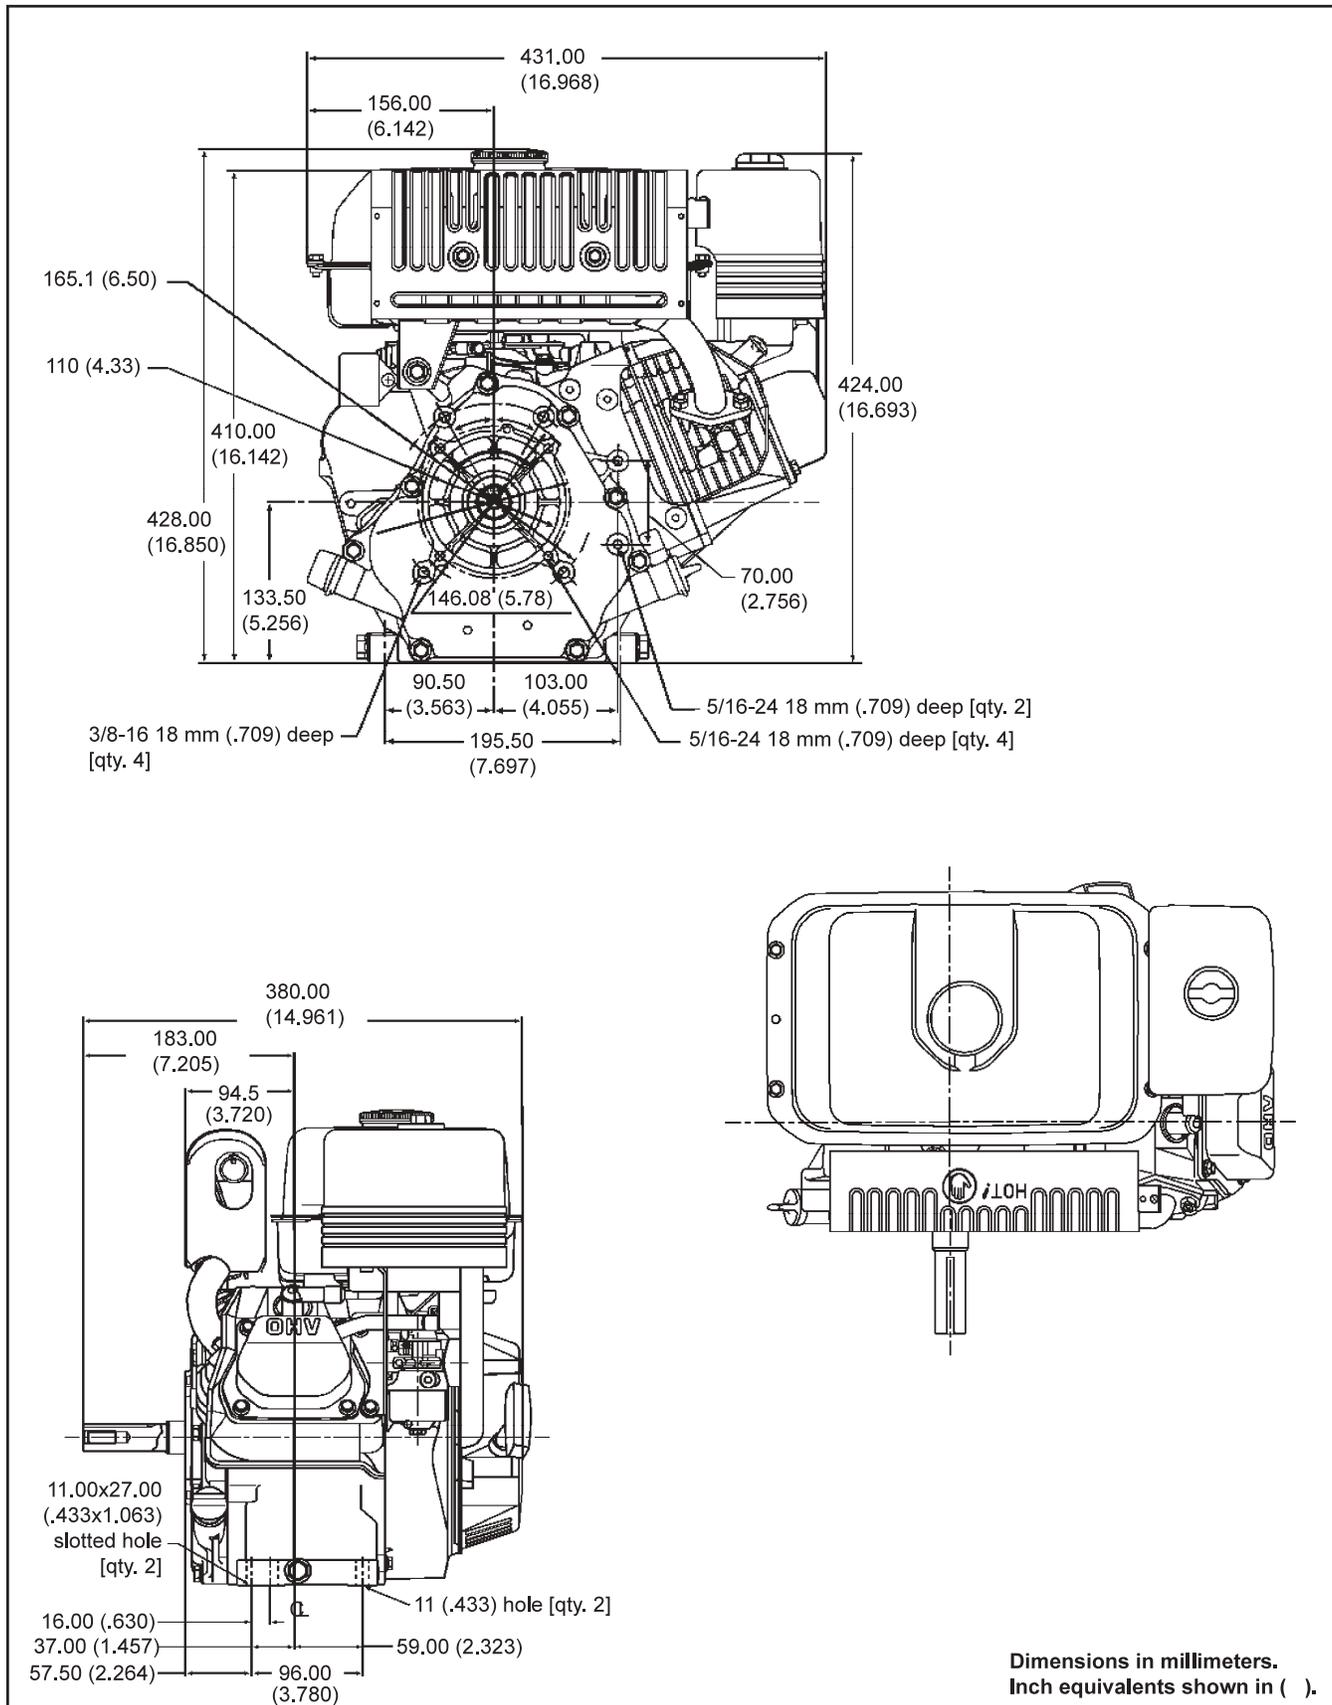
Typical Engine Dimensions CS8.5 (spec. 95xxxx).
